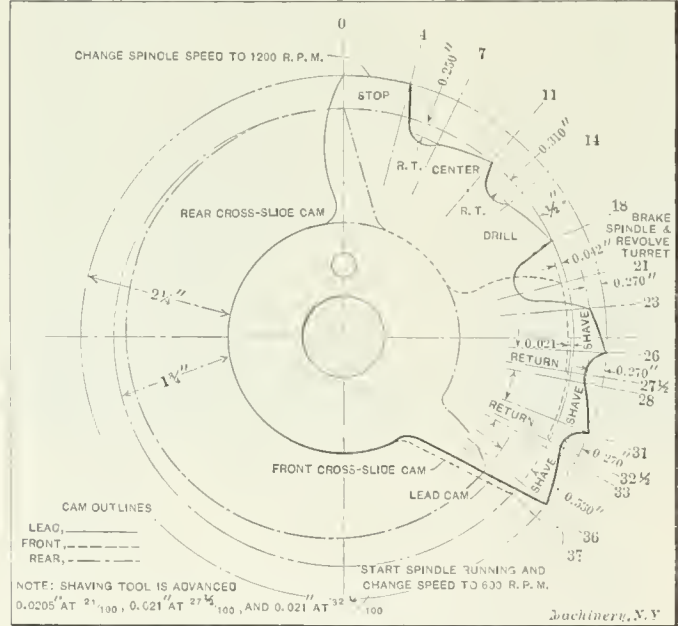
Lay-out of the Cams used in Making the Piece shown at A in Fig. 1
